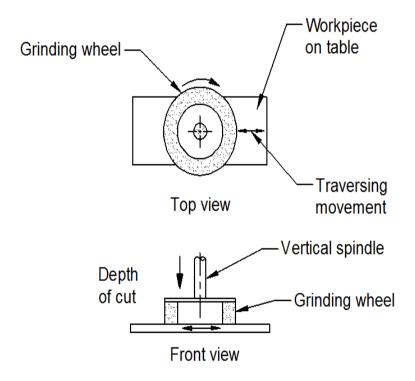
Vertical spindle Reciprocating table Grinder
